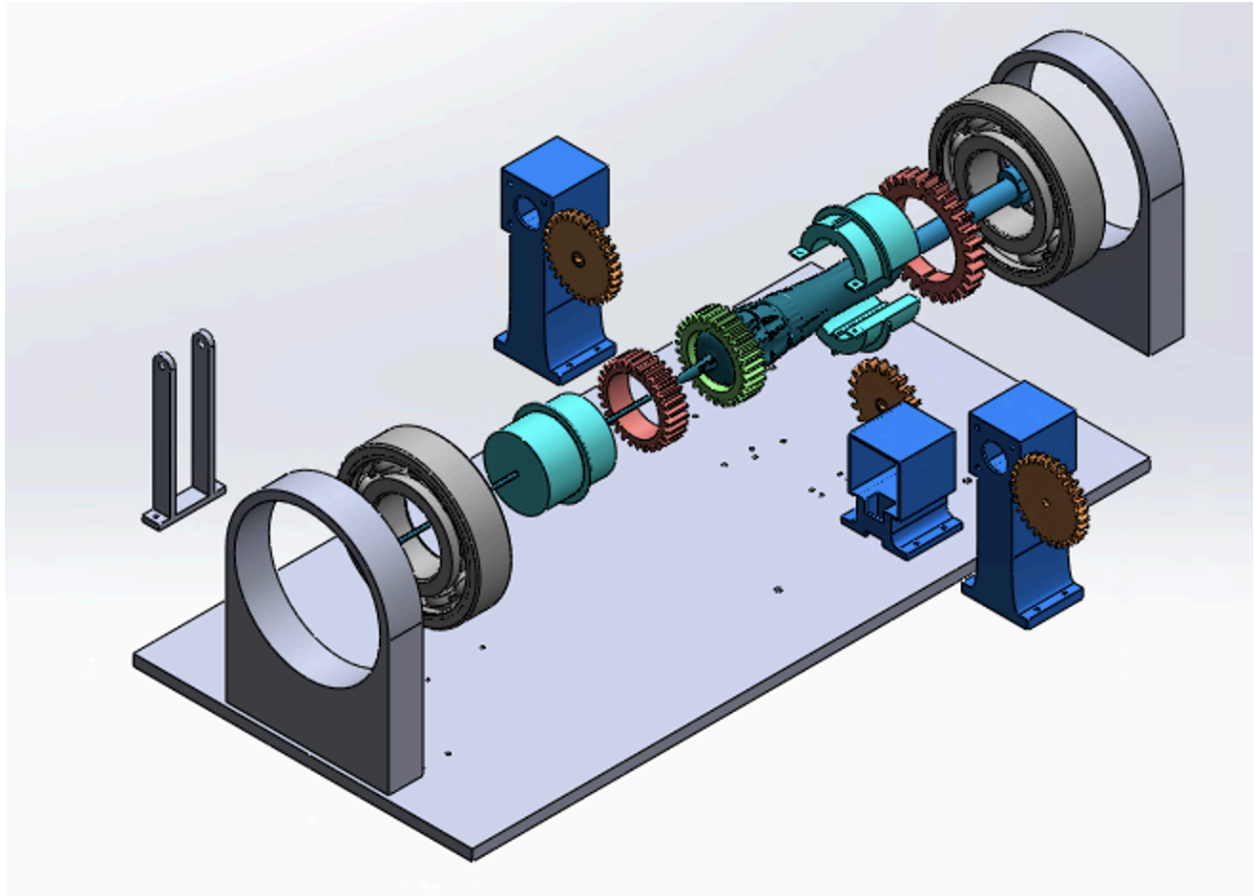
Expanded isometric view of the Solidworks assembly of the robotic catheter system.
